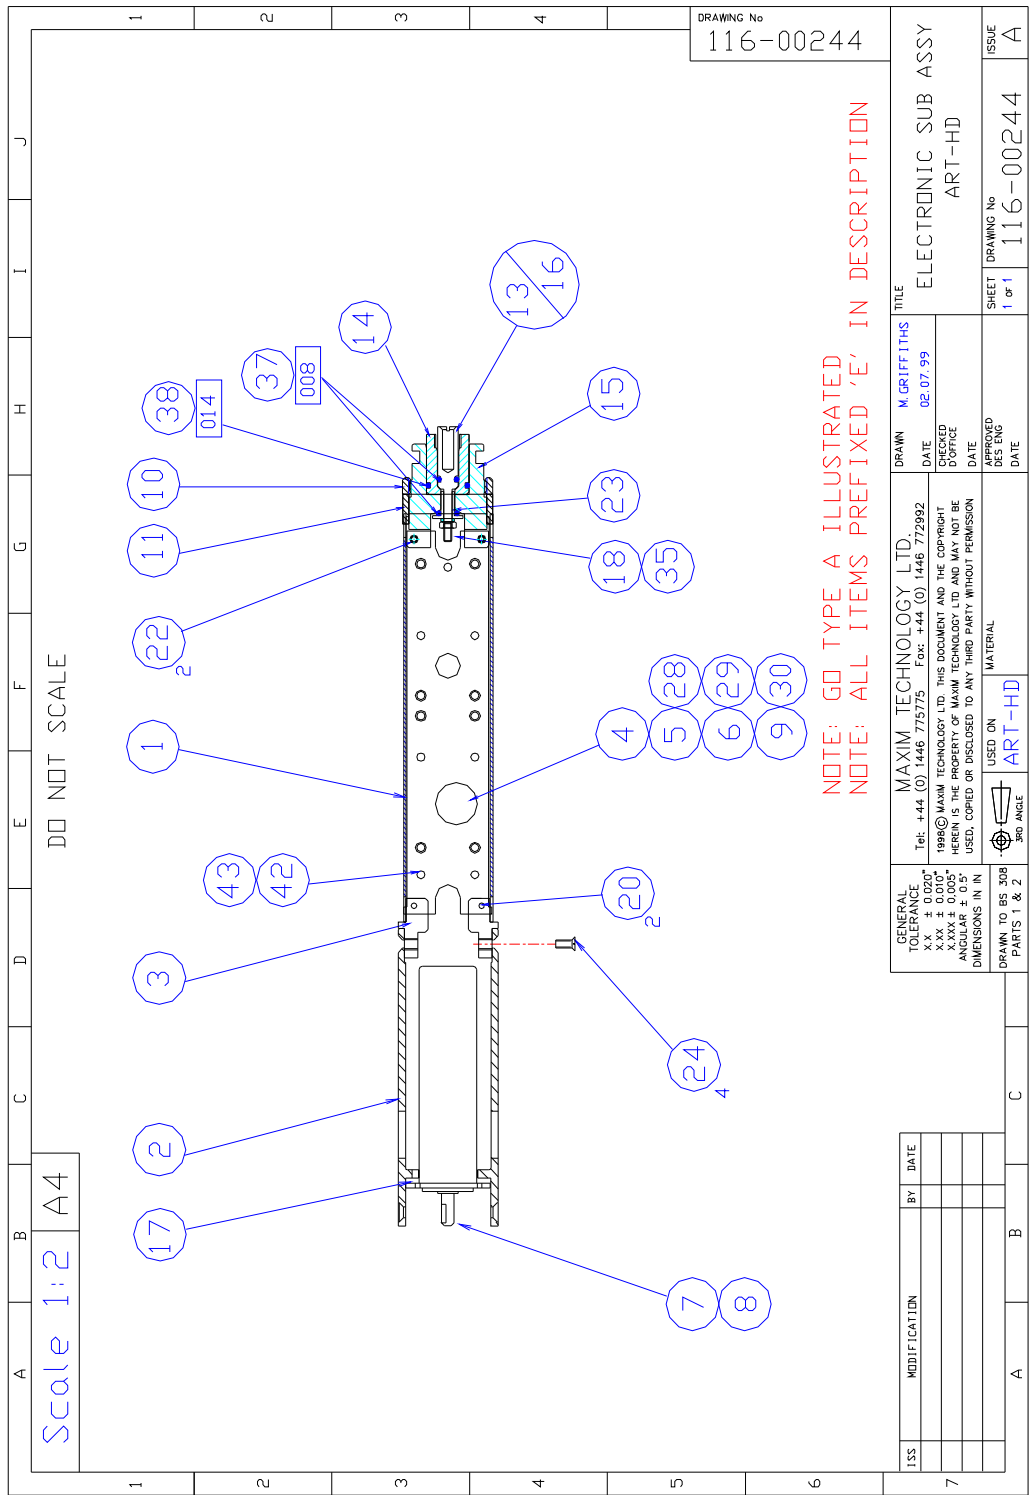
Assembly Drawing, Electronics, ART-H/F – 116-00244-A
